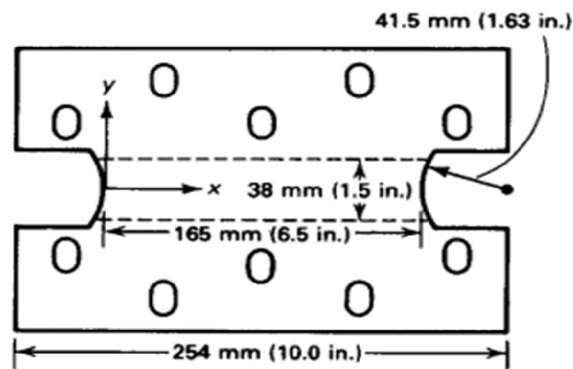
Wide sheet sample used for in-plane tensile deformation testing used by Wagoner and Wang [36]
